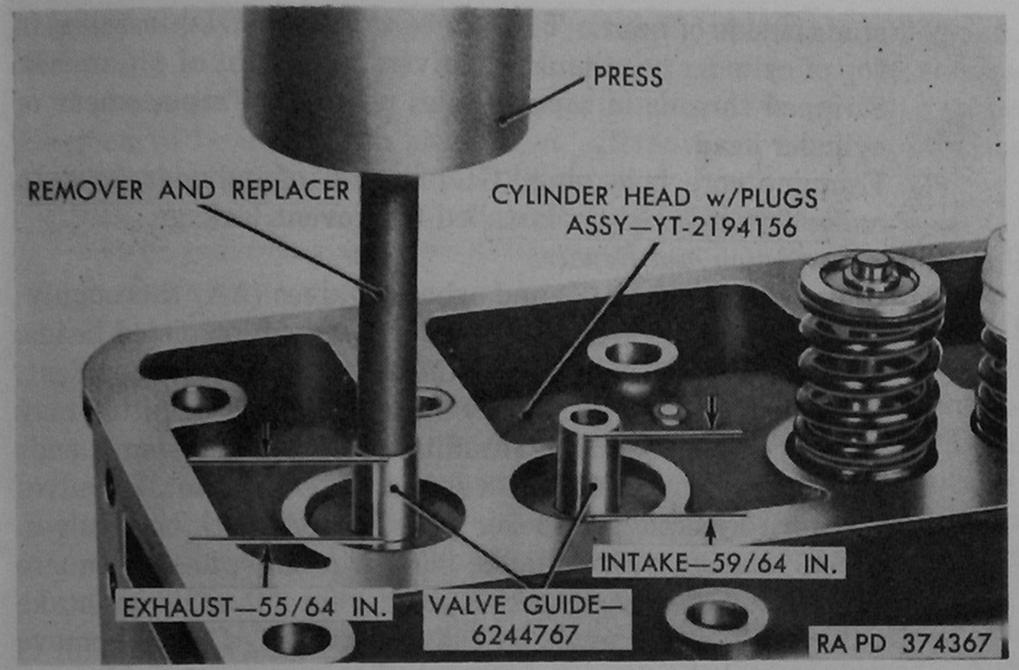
Installing valve guides in cylinder head using remover and replacer 5379773.
